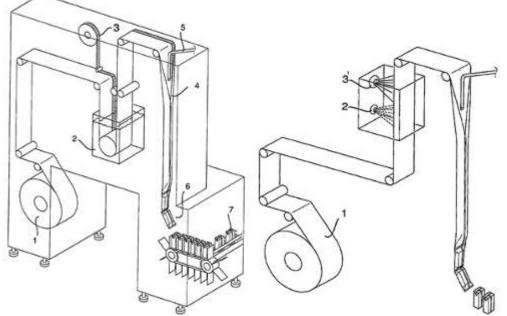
Chemical treatments applied to packaging materials for forming, filling and closing 1 – roll with packaging material; 2 – immersion area in sterilizing solution; 3 – packaging accessory; 4 – packaging formation; 5 – filling the packaging; 6 – packaged product; 7 – full packaging disposal; 2' – splash area; 3' – hot air drying area
